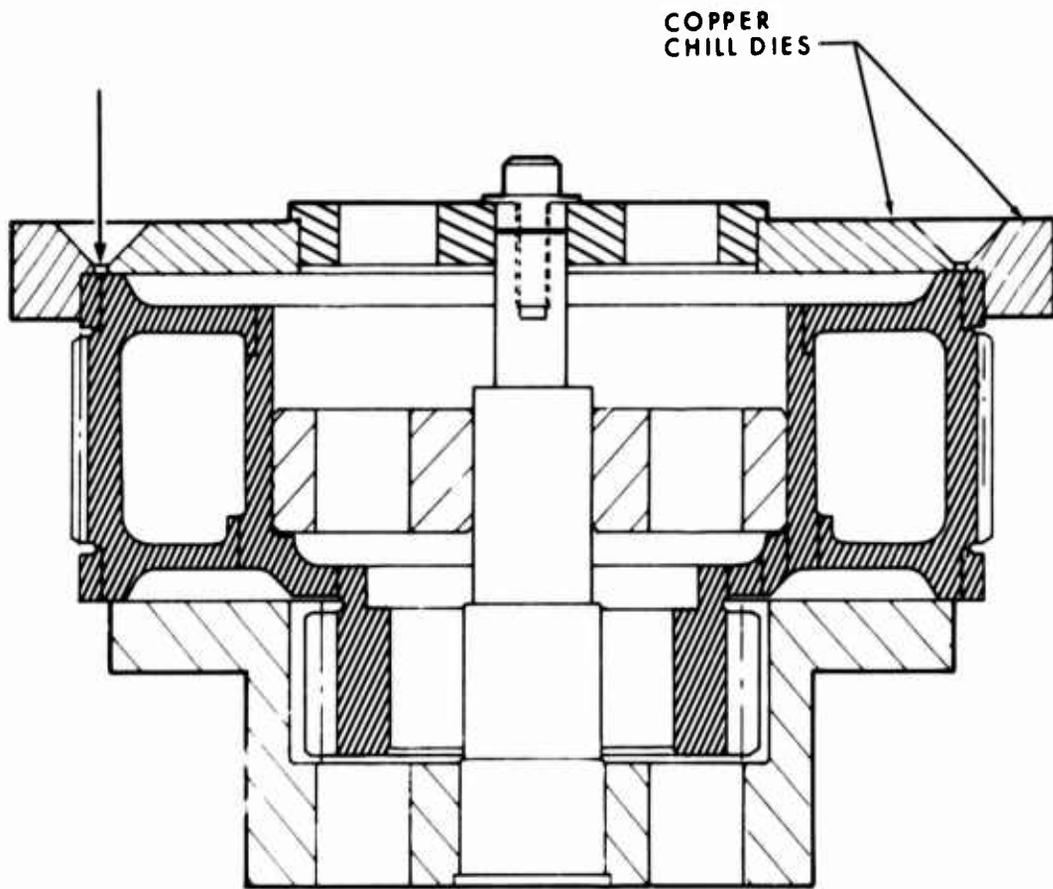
Welding Fixture for Second-Row Pinion Upper Roller Weld.
